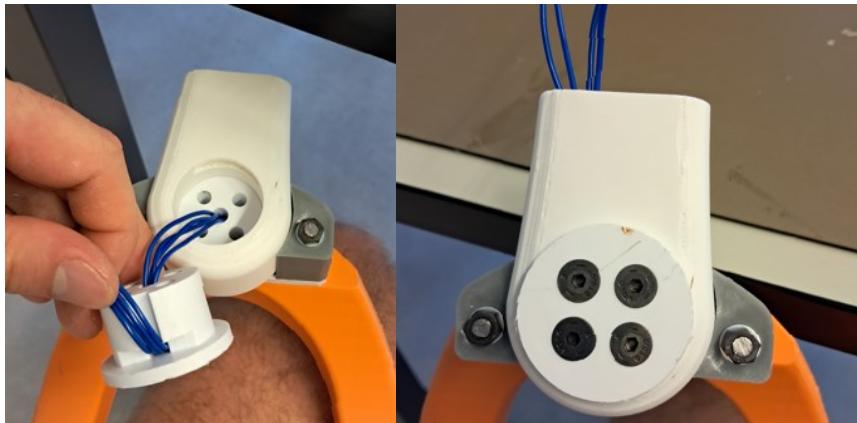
Mounting of Lever to Connection Bolt [Own Illustration]
